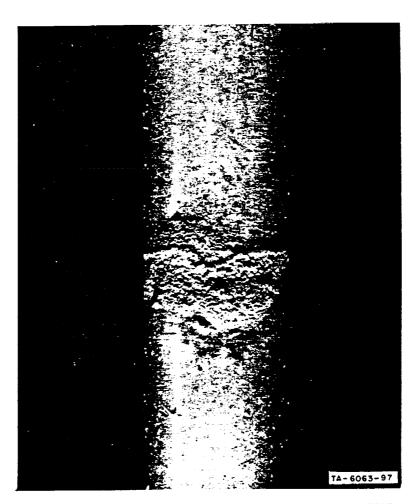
BRAZED JOINT ON 6061-T6 ALUMINUM (10K)
